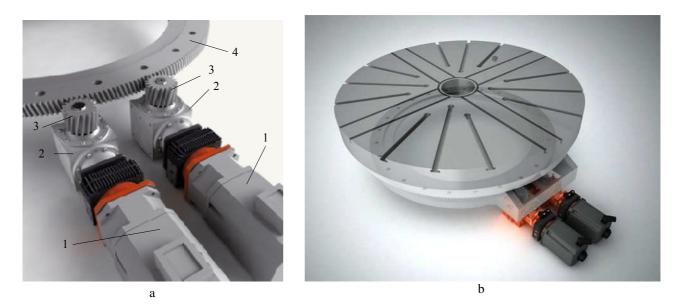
Construction of an anti-backlash system with two pinions electrically preloaded: *a* – detailed components of the electric anti-backlash; *b* – detail of the table feed drive assembly of a vertical lathe (REDEX).
